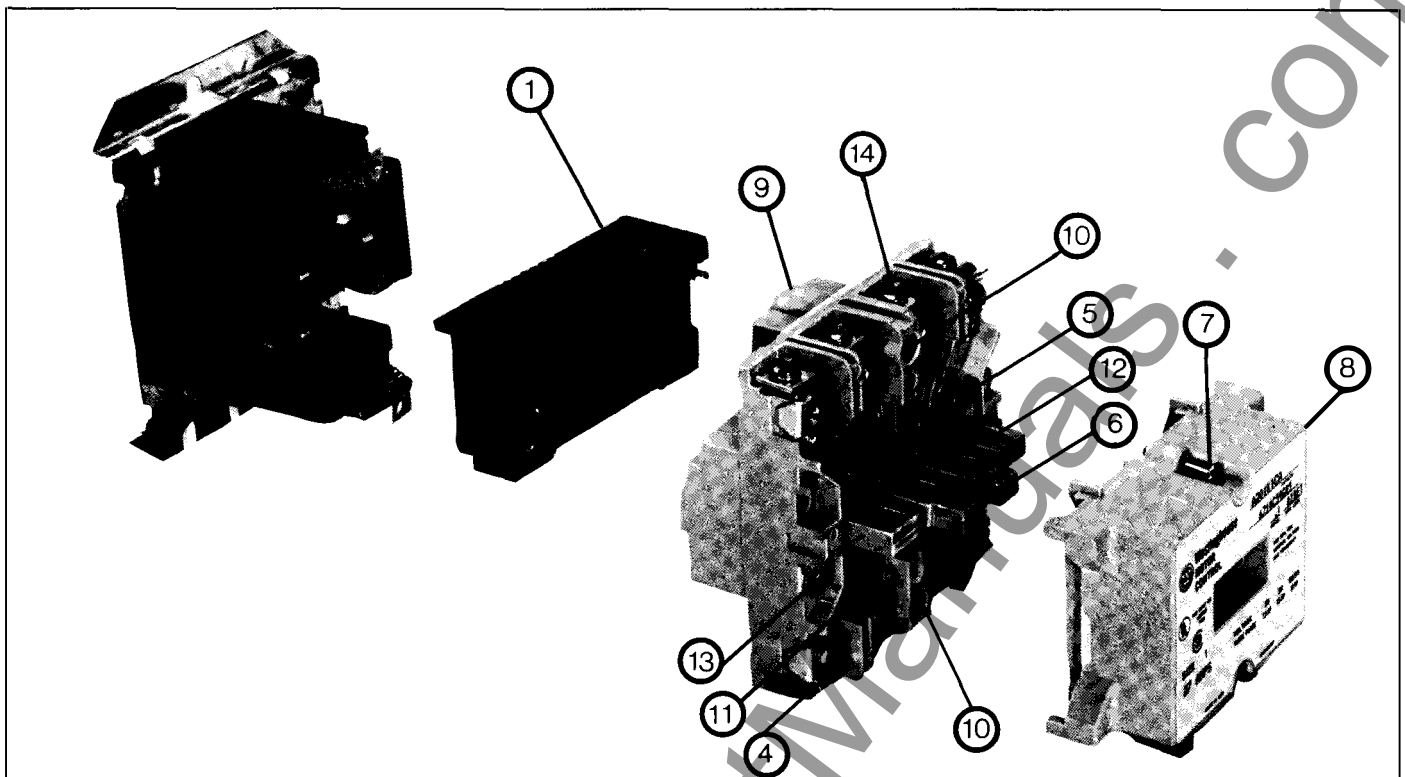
30 Ampere, A202 Contactor (Exploded View)
